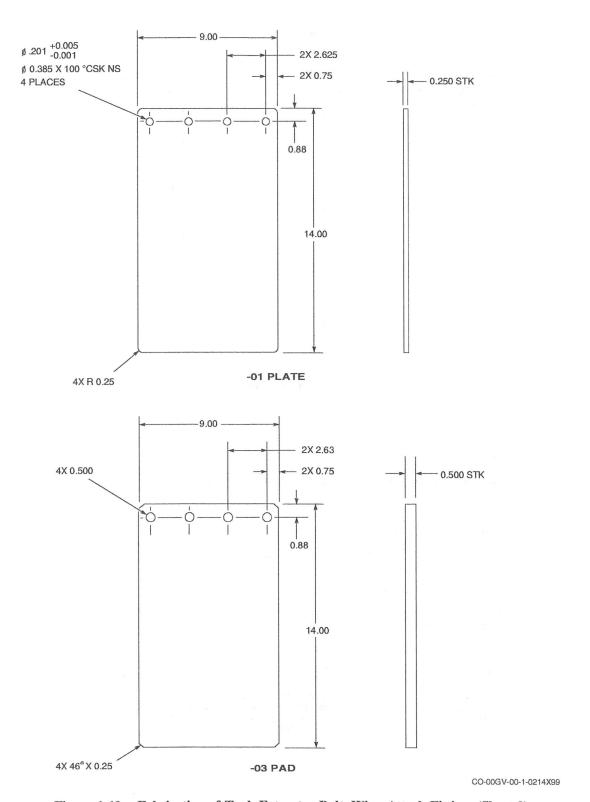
Fabrication of Tool, Extractor Bolt, Wing Attach Fitting. (Sheet 9)
